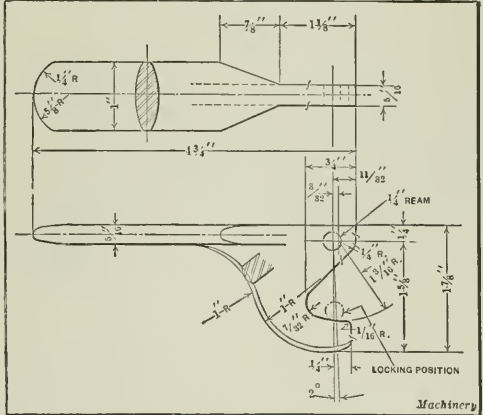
Drill Jig Clamping Handle of the Cam or Eccentric Type
